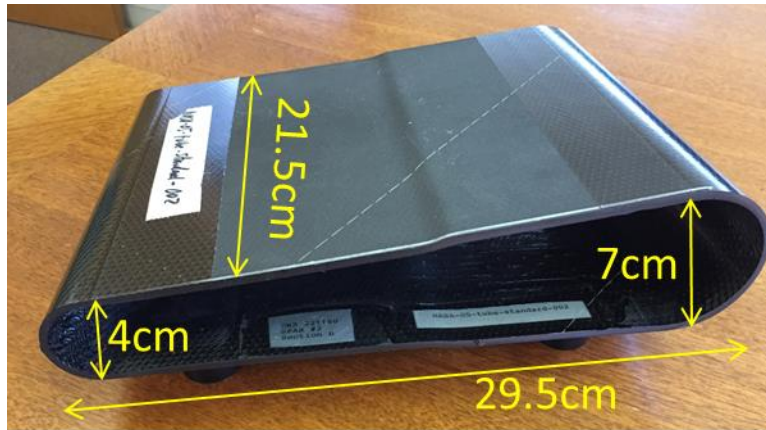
Photograph of a typical rotocraft blade spar tube specimen.
